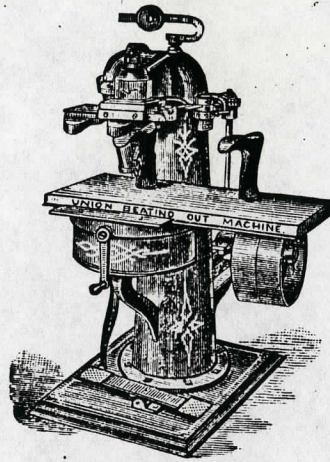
The Giant Beating-Out or Levelling Machine.
